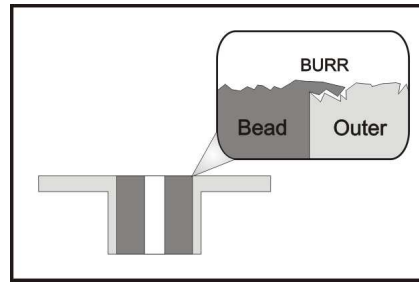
Probe showing bead burr extending over the outer conductor.
